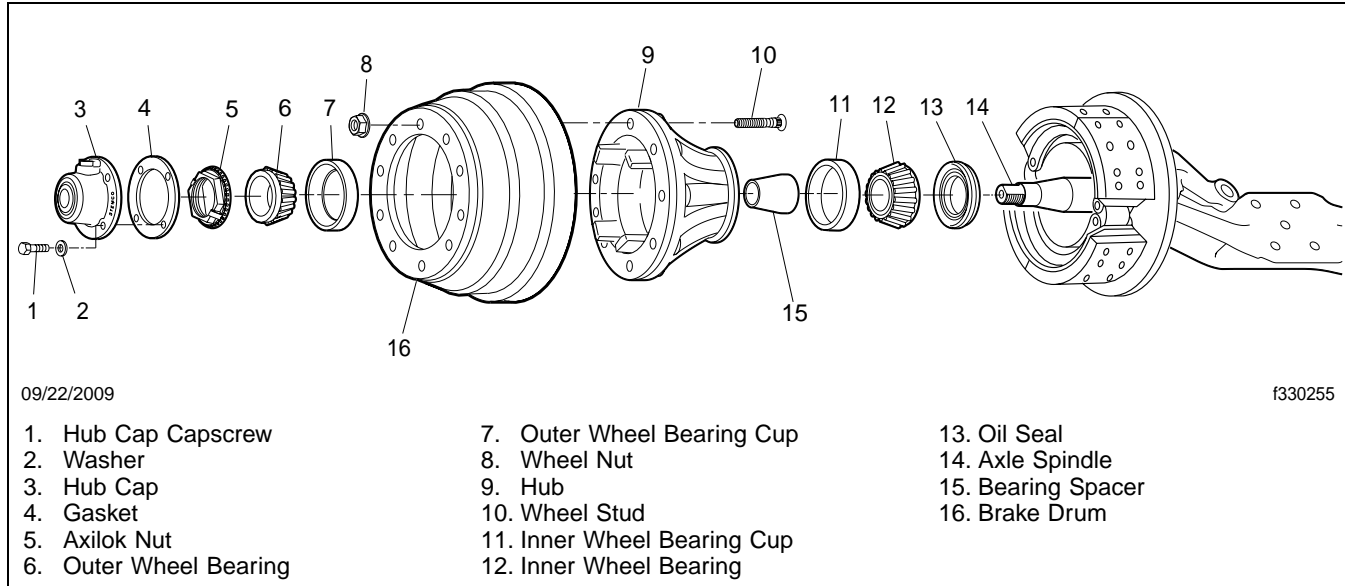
, Typical Wheel End Assembly, Front Axle with Drum Brakes
